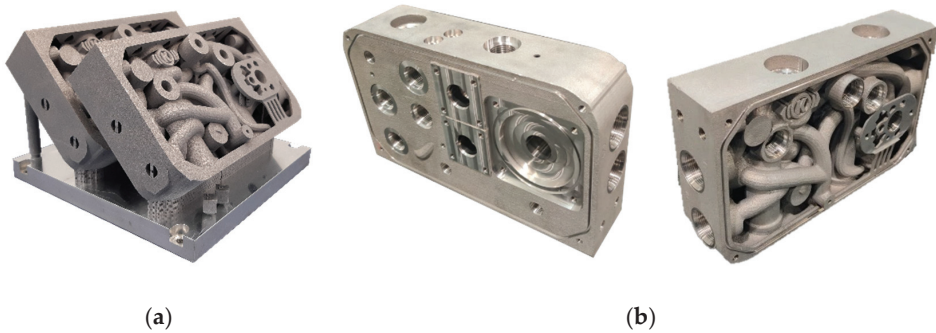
(a) The unfinished 2-manifold build job with tensile- and density-test-specimen; (b) finished manifold.
